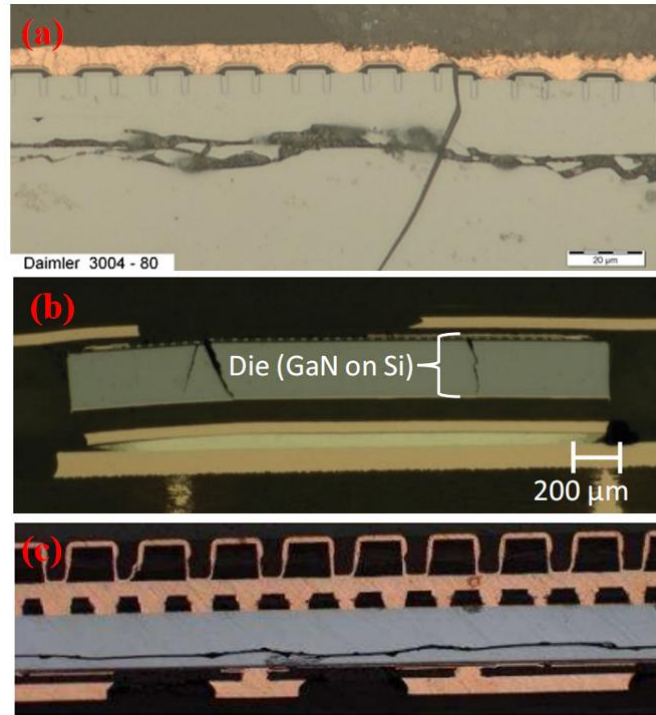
Failure modes in sintered silver die-attach structures under high-pressure conditions: (a) Interfacial delamination and horizontal cracking [48]; (b) Vertical fracture through GaN-on-Si die [49]; (c) Interfacial cracking along die bottom [50].
